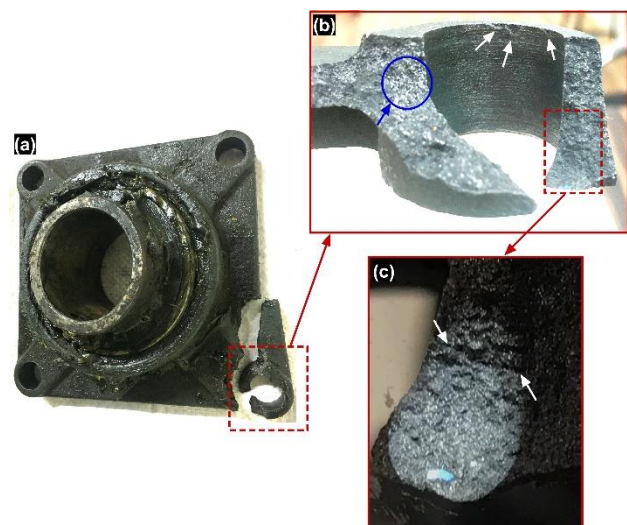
(a) Fracture in the housing unit of UCF-216, (b) general macrostructure of the broken piece, (c) traces of ductile fracture and fatigue failure.
